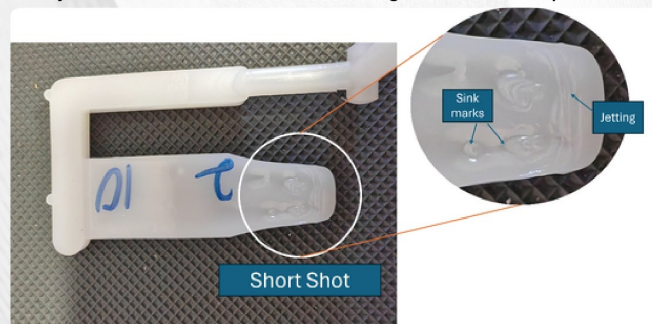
Injection moulded part produced at injection end positions of 10 mm.
